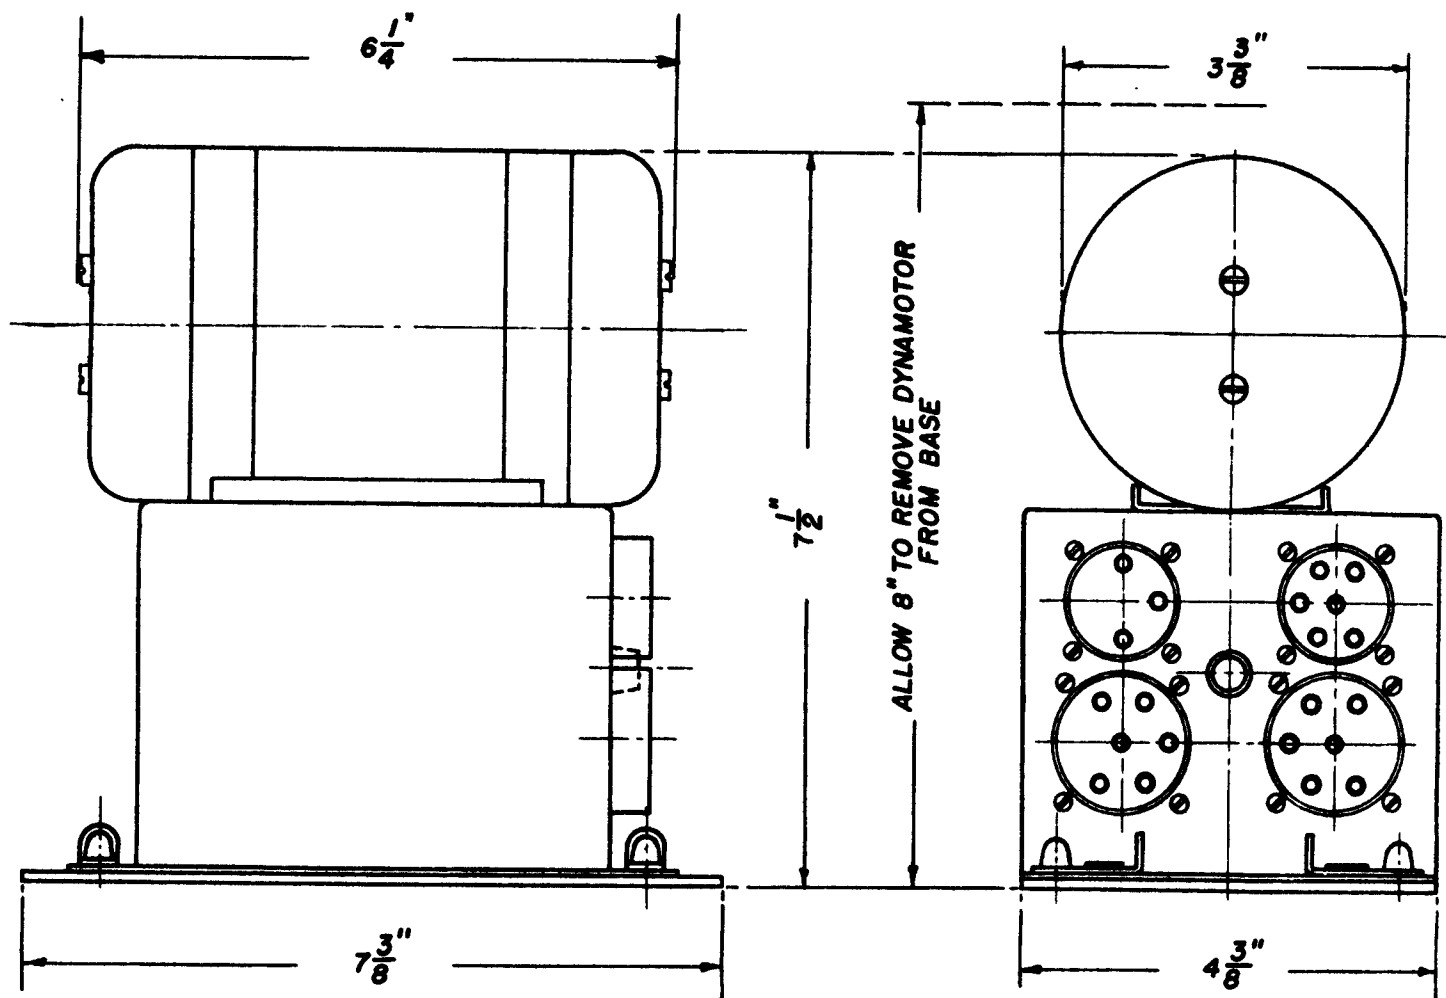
TYPE MP-5B OR MP-5A24 OUTLINE DRAWING
